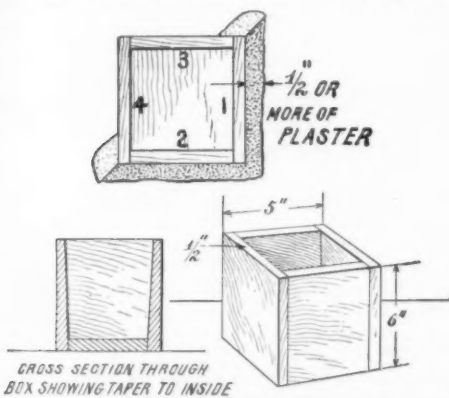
THE WOODEN MODEL AND PLAN VIEW SHOWING PLASTER APPLIED.
